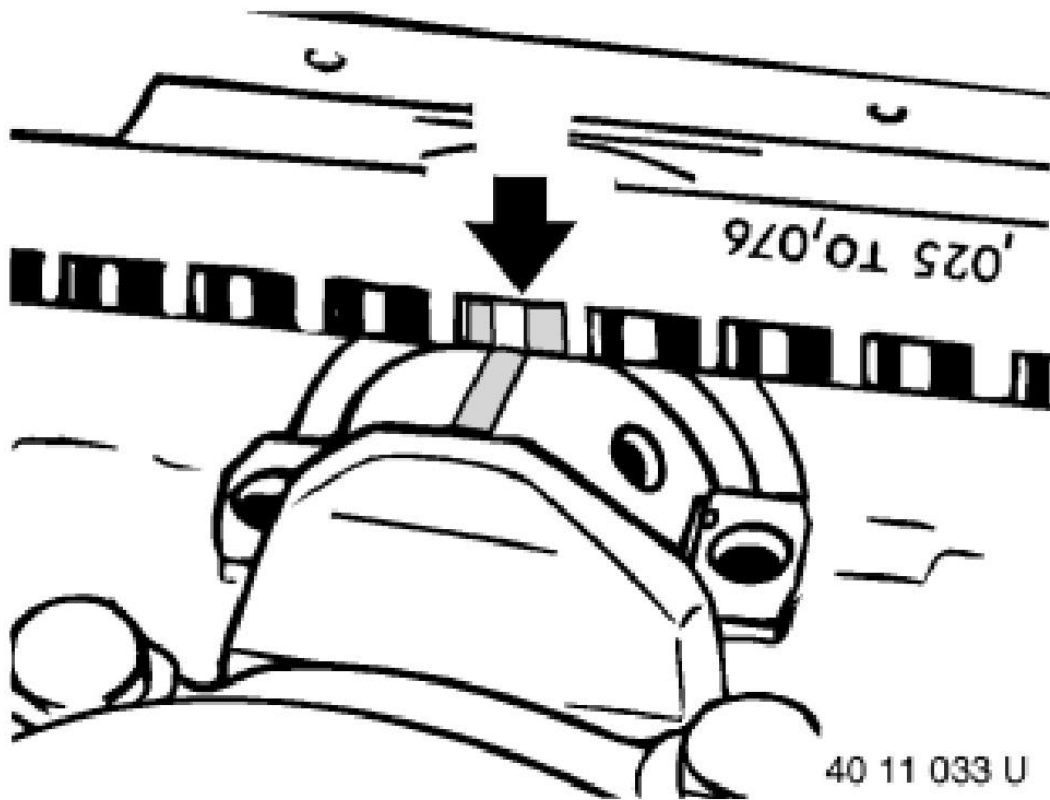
Checking Connecting Rod Bearing Clearance With Measuring Scale
